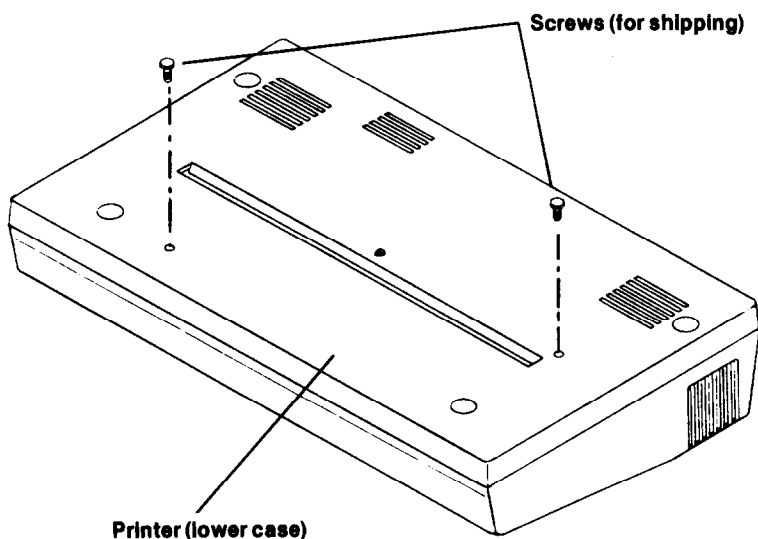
Turn your printer over and place it on a padded cushion, then remove the two "fixing" screws with a Phillips-head screwdriver.
